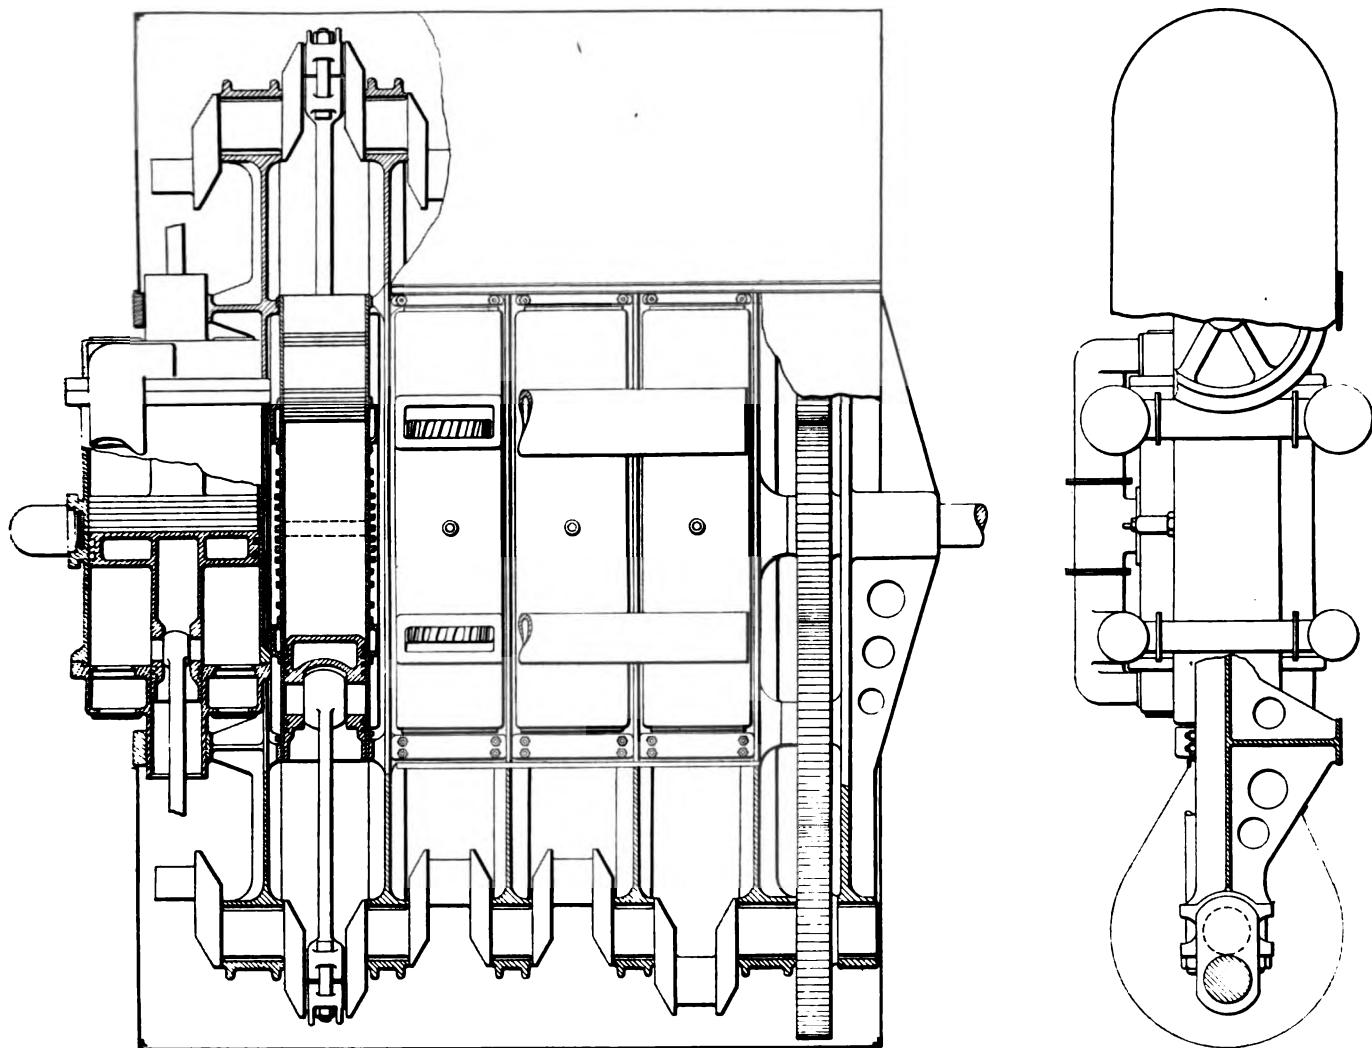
Junkers aeronautic four-cylinder two-piston engine, with cranks at opposite ends geared together
